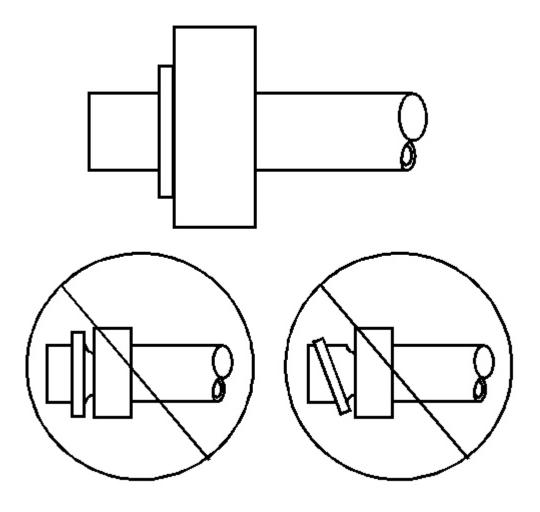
Identifying Good & Bad Sealing Washer Positions Courtesy of GENERAL MOTORS CORP.
